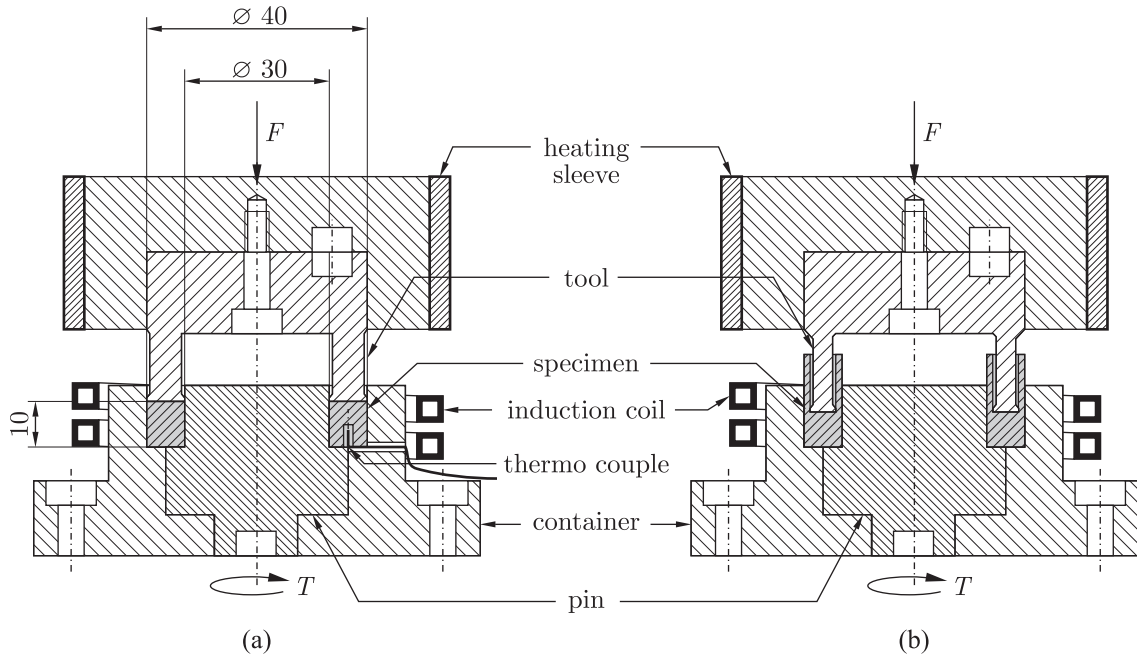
Toolkit used in the preliminary warm forging tests with entrapped specimen (a) and modification for defined surface expansion (b). It revealed that configuration (b) did not work with hot aluminium due to unsteady conditions during the test.
